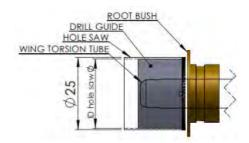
Removal of Nylon bush with a drill and drill sleeve
